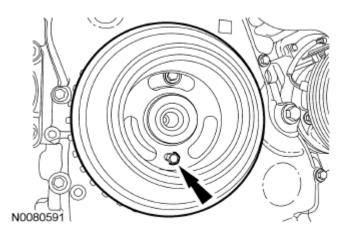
Locating Crankshaft Pulley Hole Bolt (6 mm x 18 mm) Courtesy of FORD MOTOR CO.
